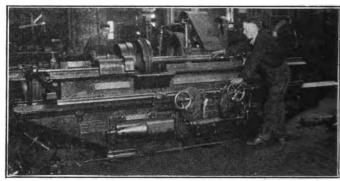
Finishing a Piston Rod on a Norton Cylinderical Grinder
